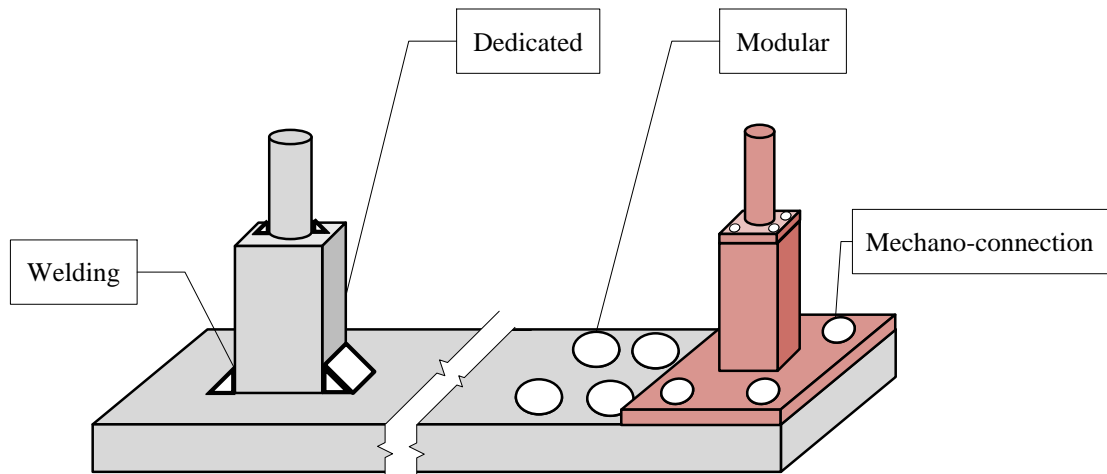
Dedicated and modular fixtures with welding and mechano-connection respectively.
